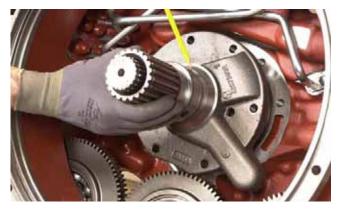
Install new o-ring and piston ring on stator support. Position stator support assembly on turbine shaft. Turn stator support assembly to clear pump drive gear. Align support assembly holes with converter housing.
